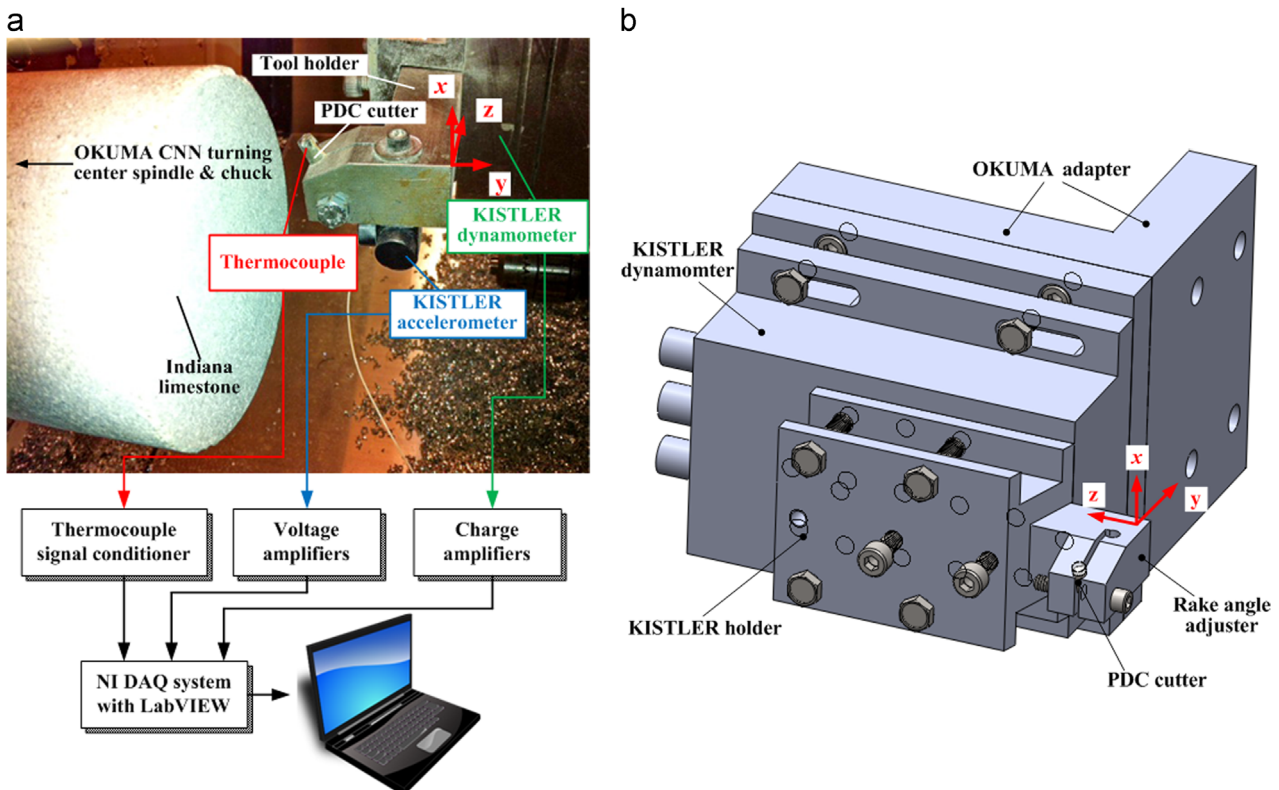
Configuration of the polycrystalline diamond turning testbed: (a) dynamic turning testbed; and (b) tool holder system on the machine's turret.
